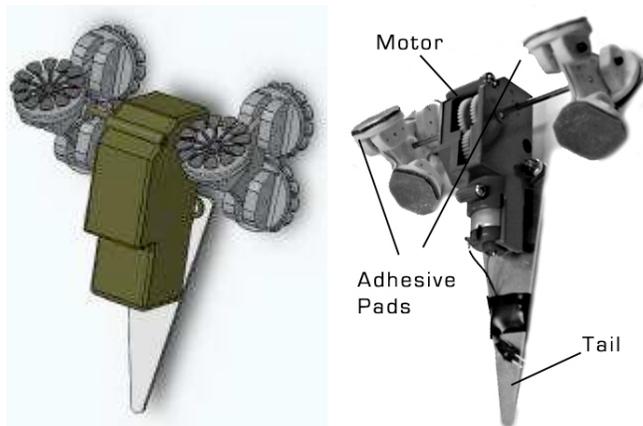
Robot with legged wheels: the CAD design (left image) and the photo of the real prototype (right image)
